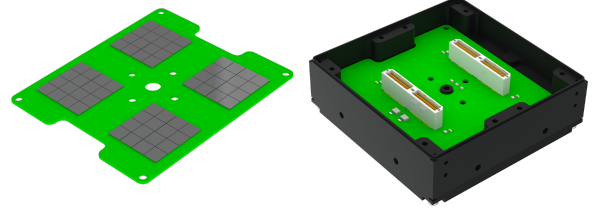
Top view (left) and bottom view (right) of the SiPM array board
